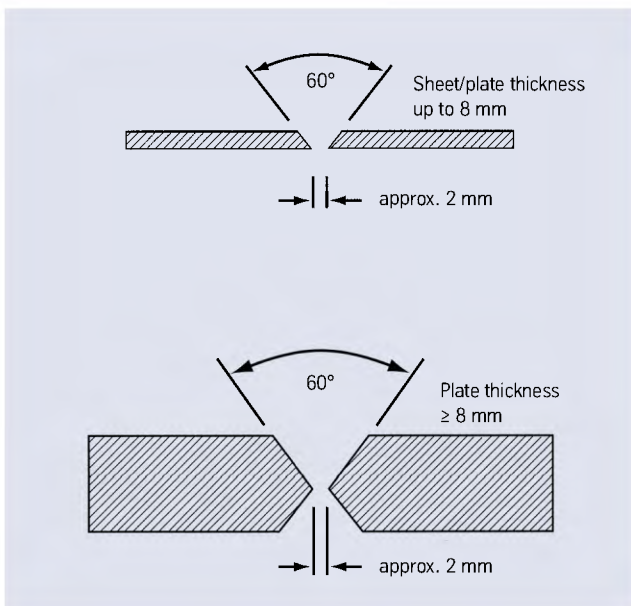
Edge preparation for welding Nicrofer 45 TM
